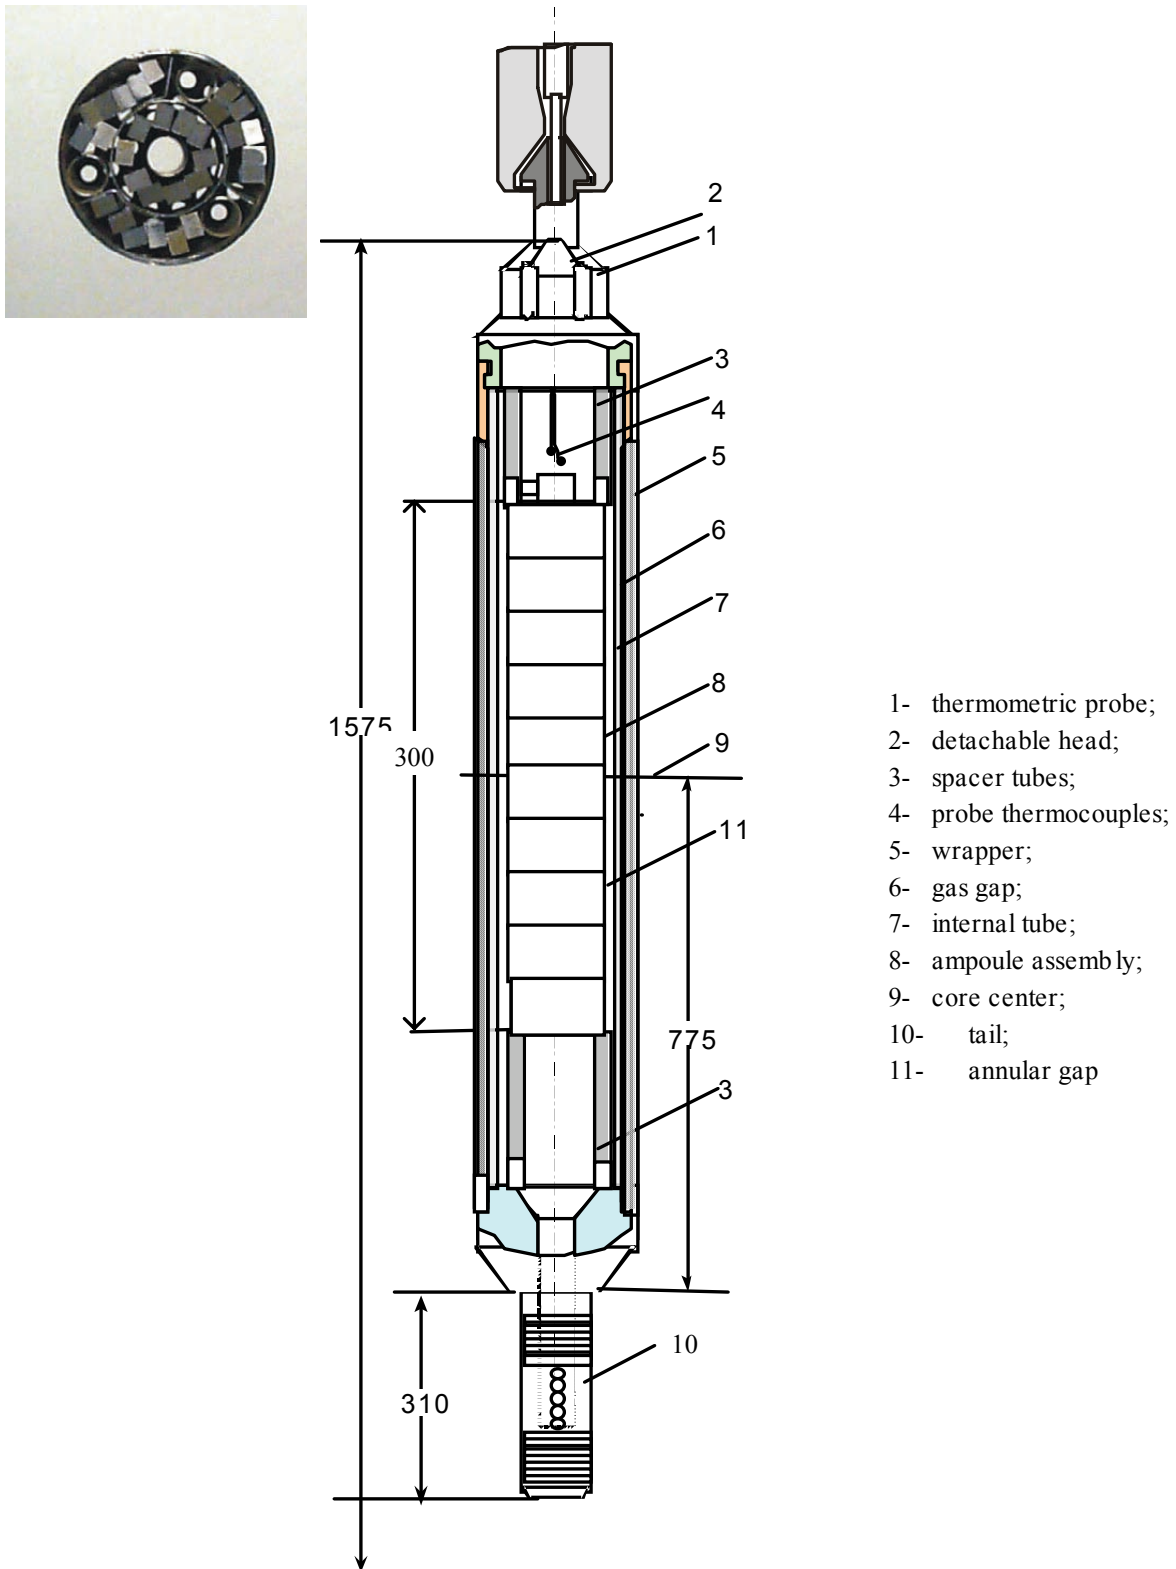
Dismountable assembly with a thermocouple. (Detail: Capsule filled with KLST mini impact specimens).
